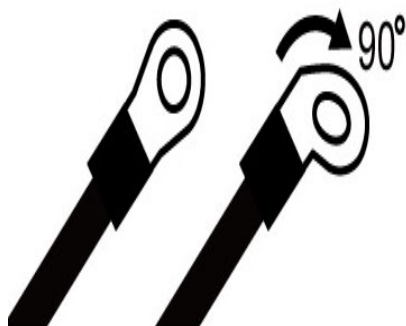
Assembling 62050P Input Terminal Safety Cover – 2
